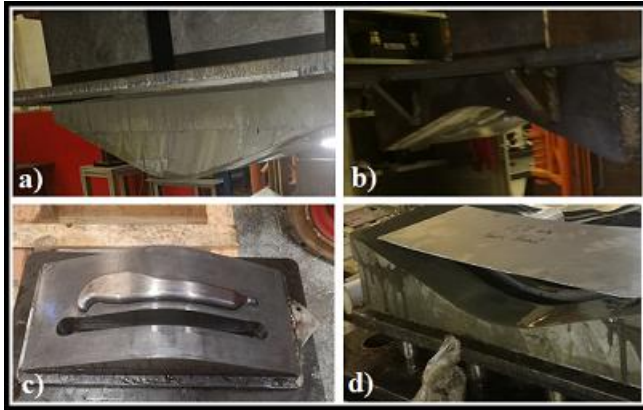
Set of stamping tools (Die, Blank-Holder and Punches) to the concave shell (a and d) and the convex shell (b and c). Blank in the initial position (d).
